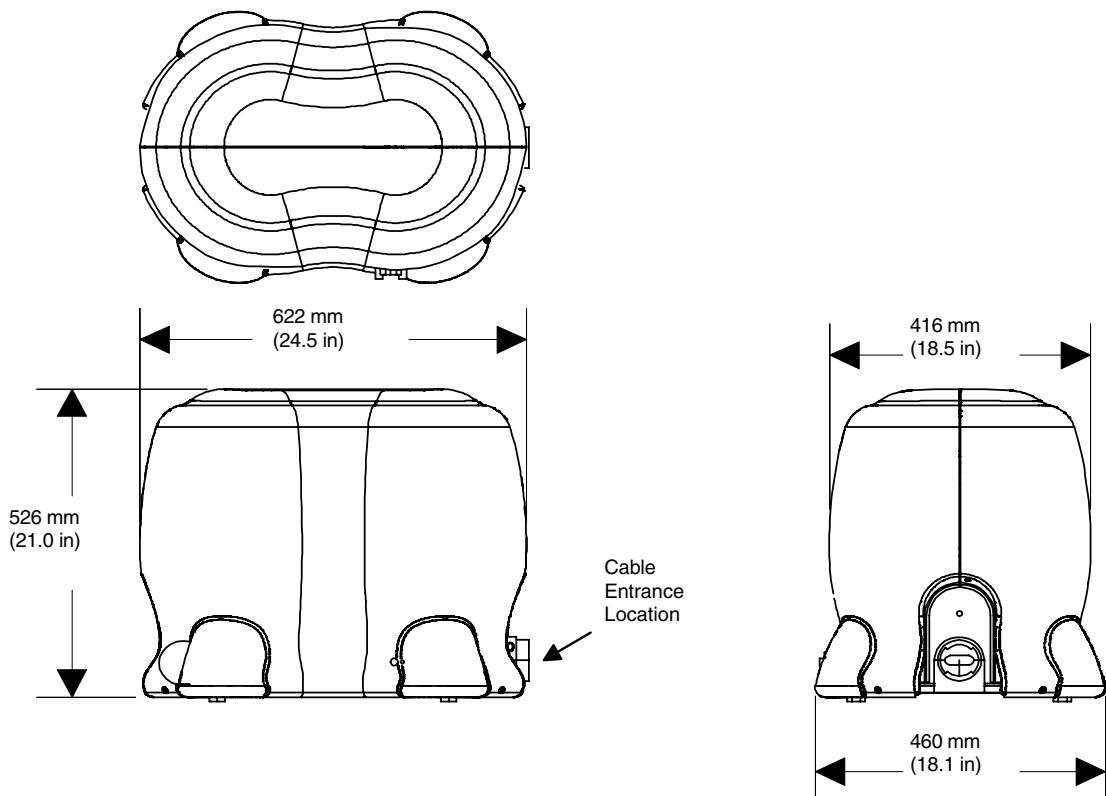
Detector Support Assembly (DSA) Dimensions
